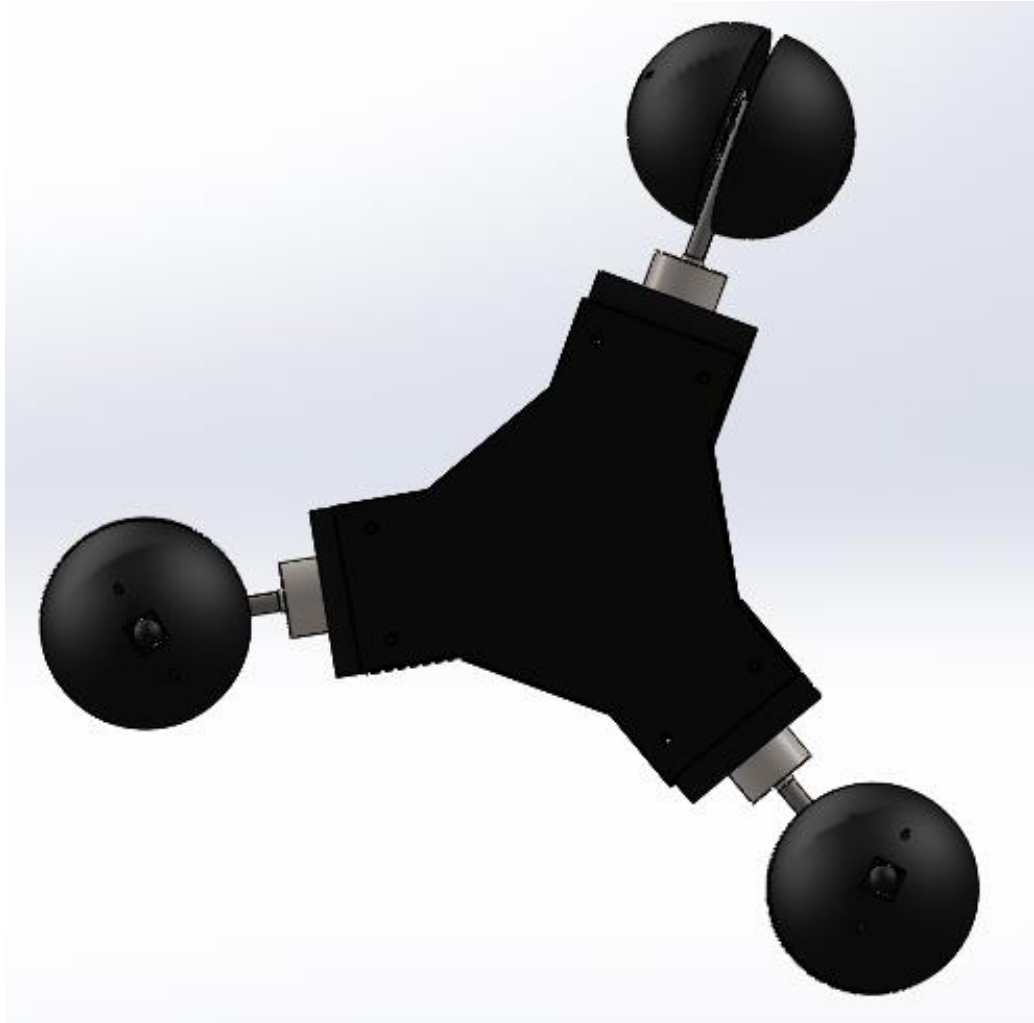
CAD Model of Prototype IV with Final Wheels (Top View)
